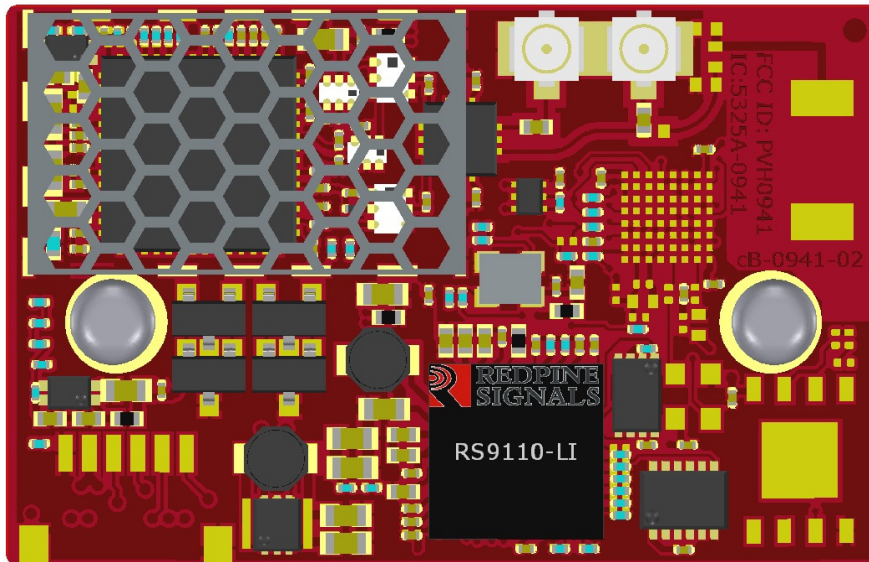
OWL253x FCC/IC identifier printed in the primary side solder mask
